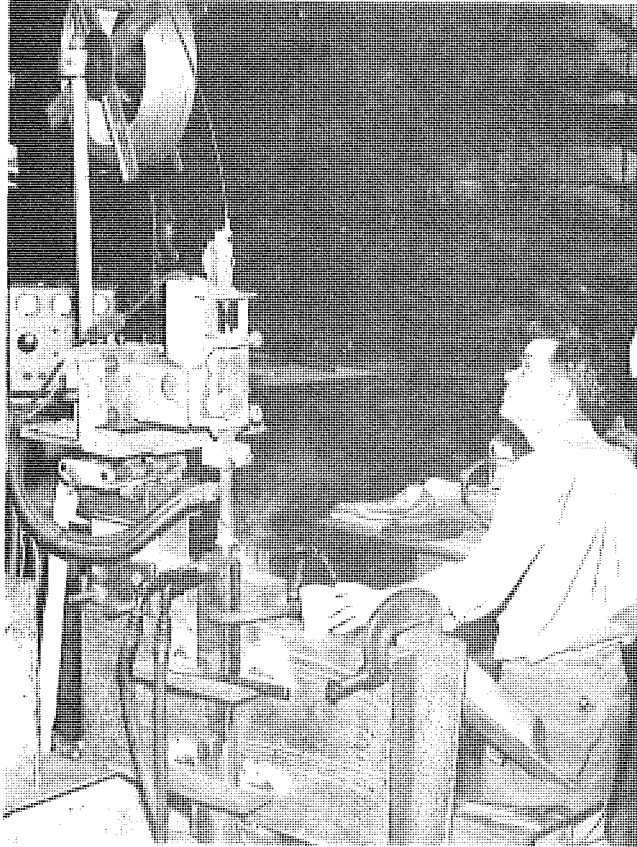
Electroslog welding procedure used by Fabricator A with water cooled retaining shoes.
